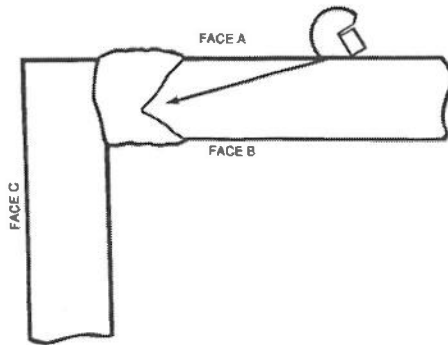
Technique B, for inspecting the Weld Volume of Double-Vee Corner Welds
